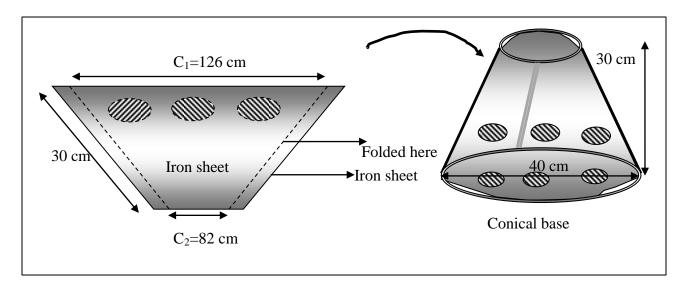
Dimensions of the iron sheet for making the air supply chamber.
